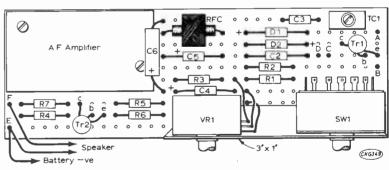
The component layout on the circuit board; the top section shows the underside wiring.
